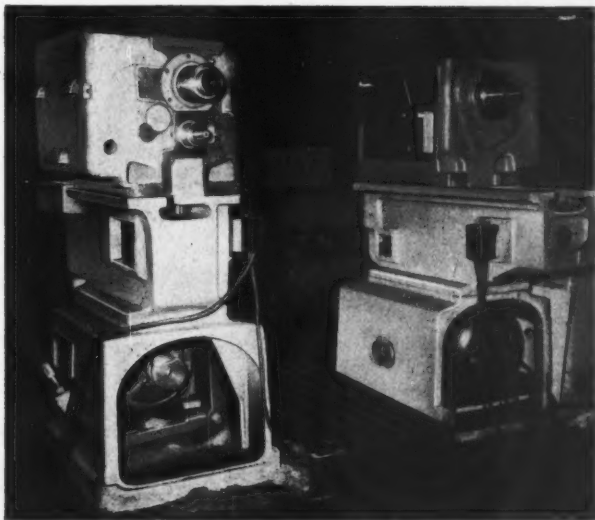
Stands for testing and running headstocks for IMOR lathes after assembly. The stands are arranged so that both sets of controls can be operated from one position
